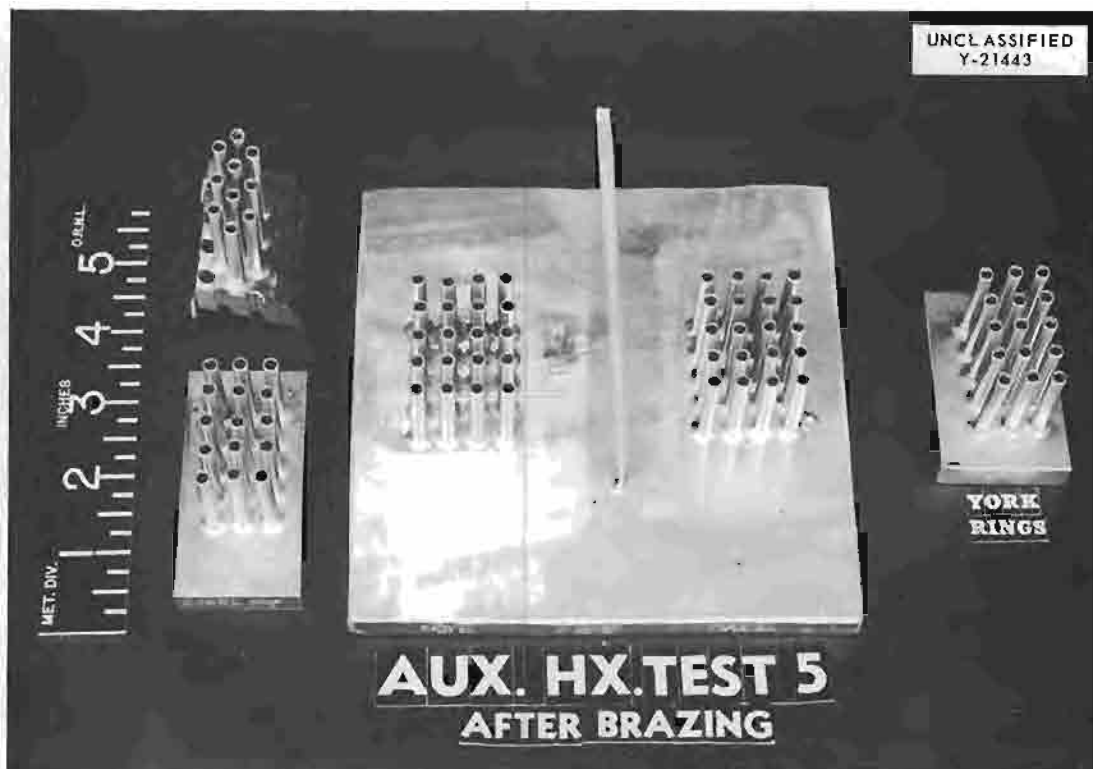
Tube-to-Header Test Assembly Brazed at a 300°F/hr Rate of Temperature Rise.
